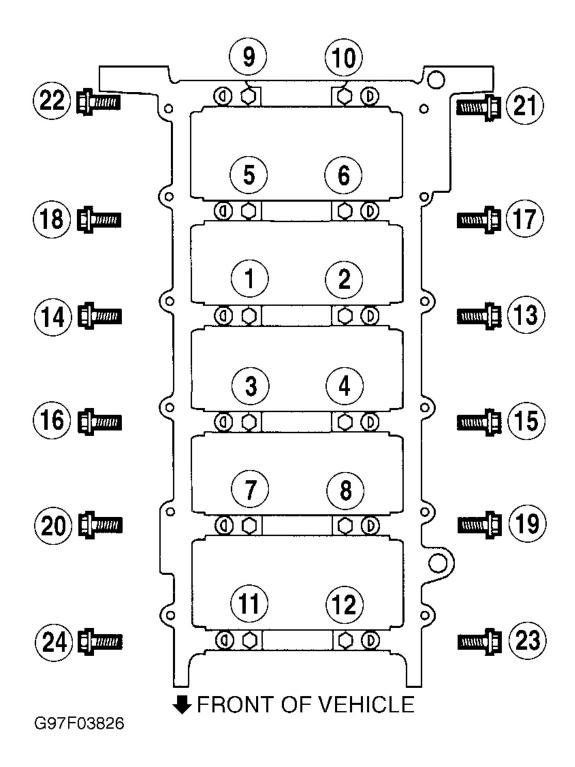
Main Bearing Cap Bolt Tightening Sequence Courtesy of FORD MOTOR CO.
